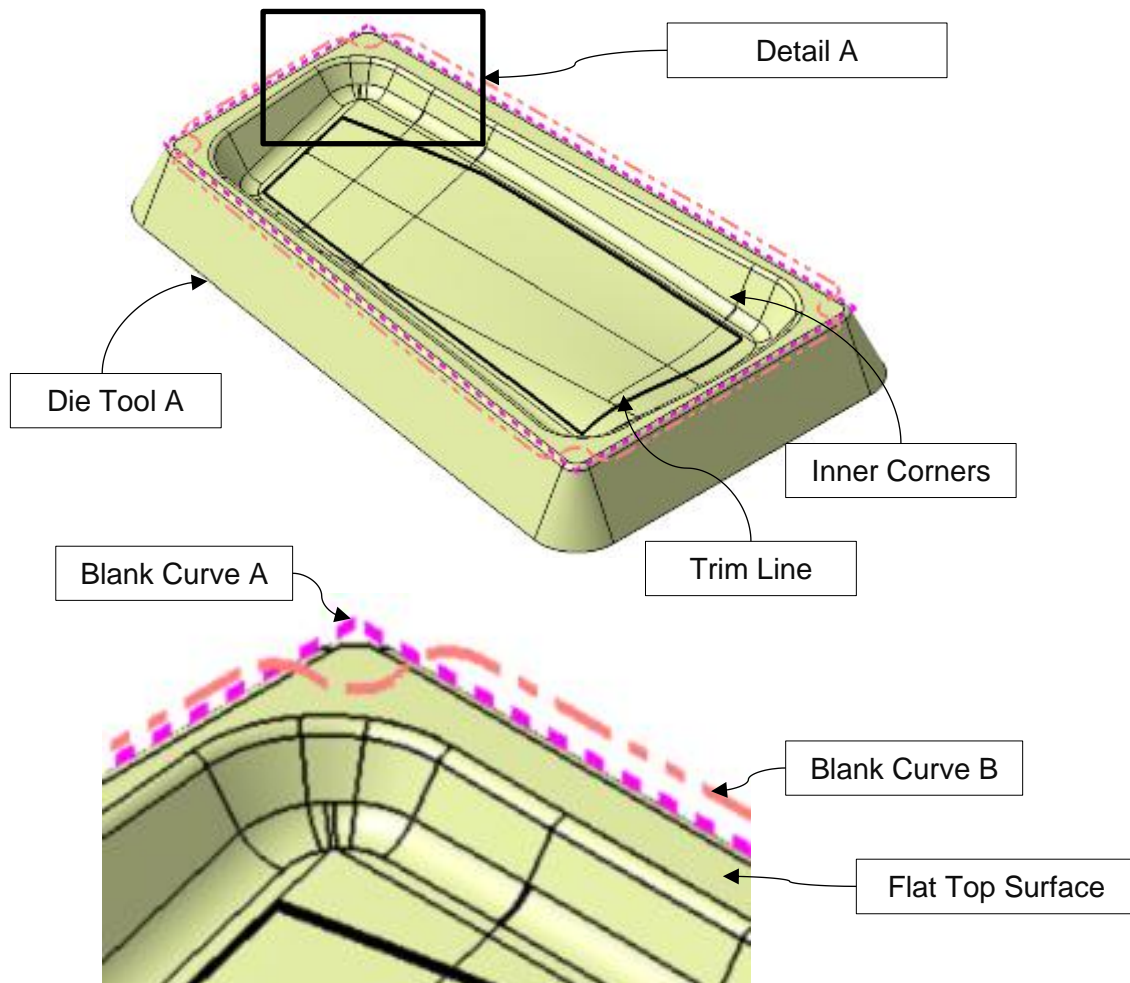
Detailed view of Concept-5's Tool A and Blank A & B
